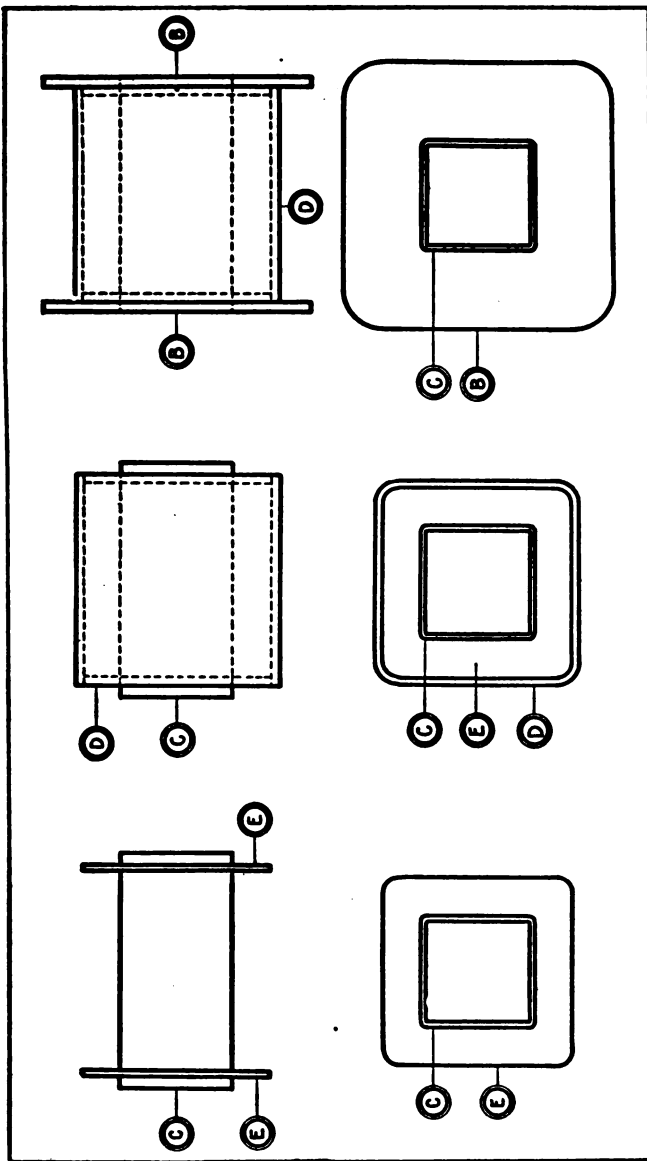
Progressive steps in assembling the cores and end pieces which support the primary and secondary winding.
